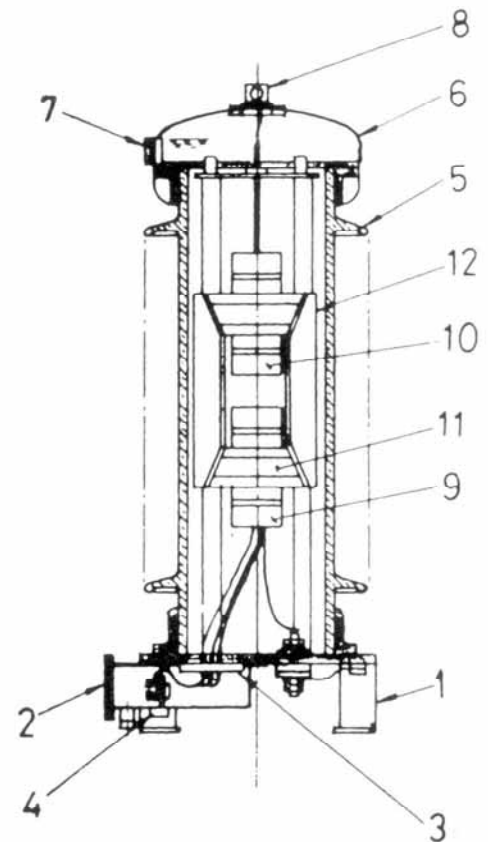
SECTIONAL DETAILS OF 110/132 kV. VOLTAGE TRANSFORMER
